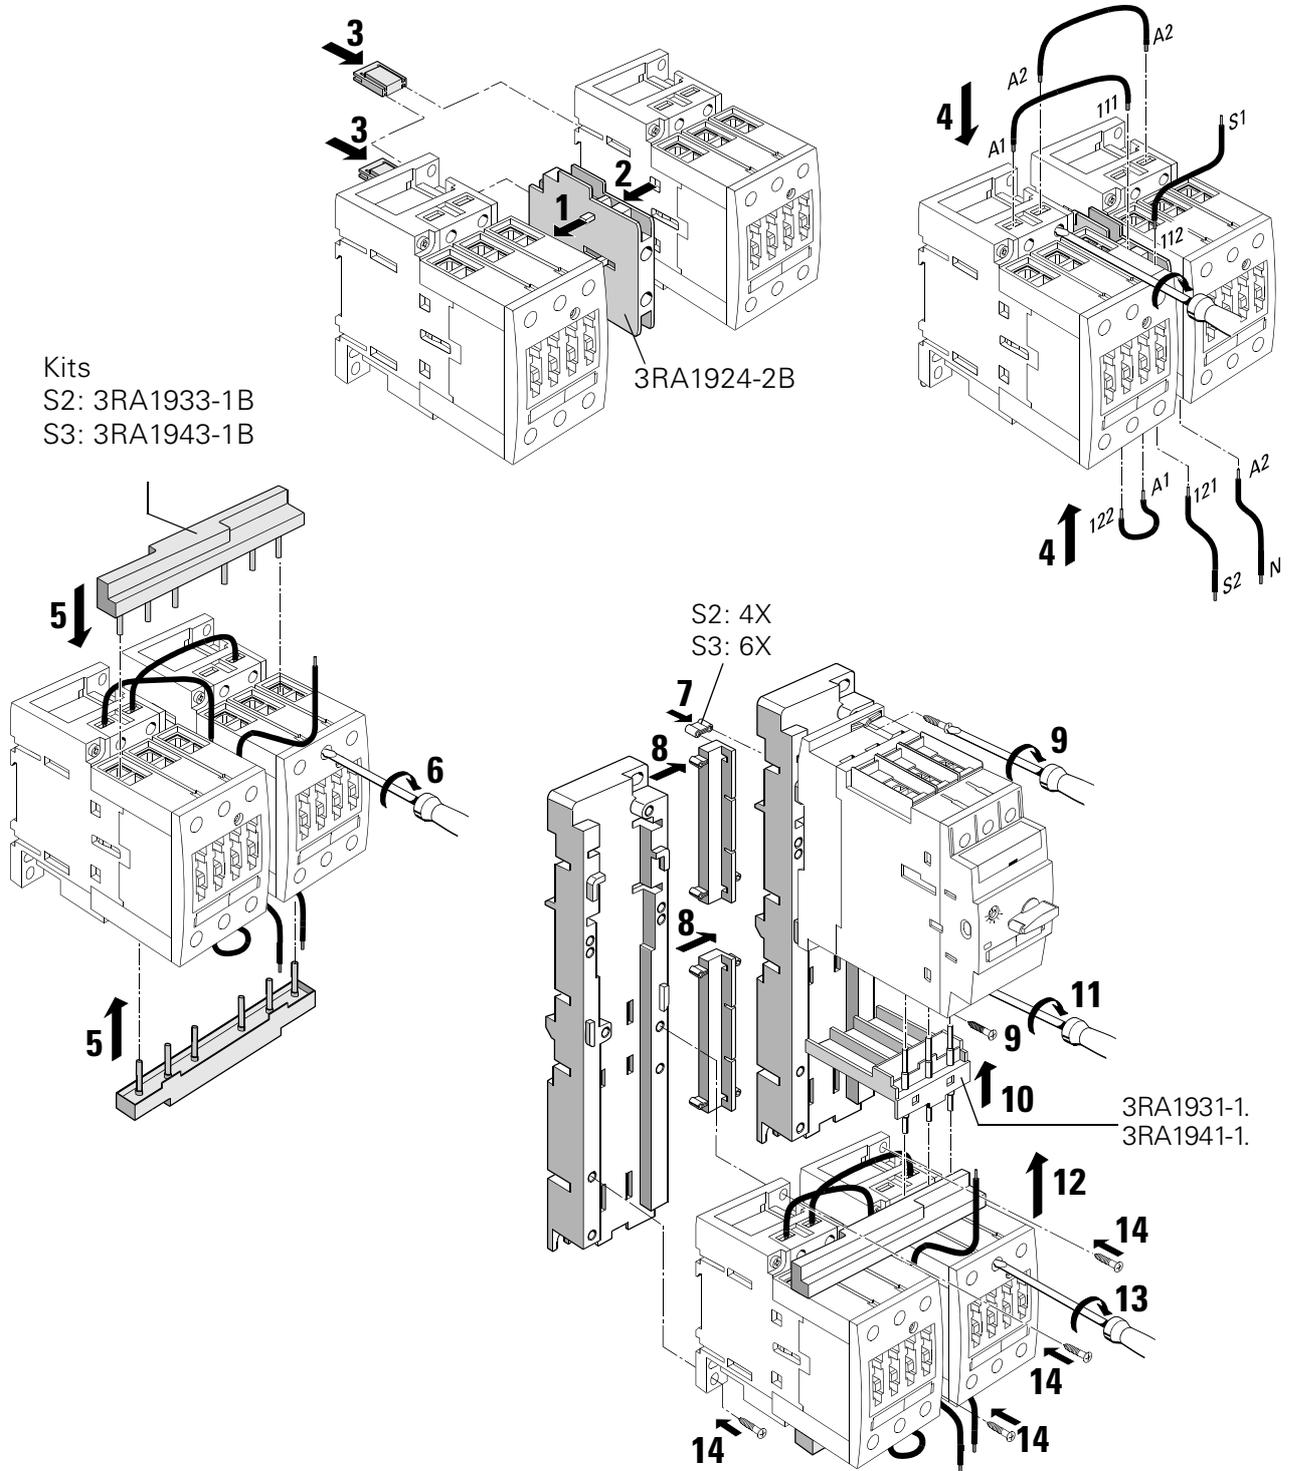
Self-assembly, rail, reversing operation (frame sizes S2 and S3)
